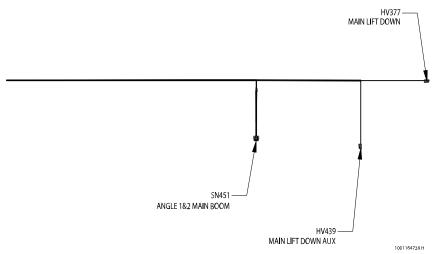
Tower Upright Valve Harness - Sheet 3 of 4
